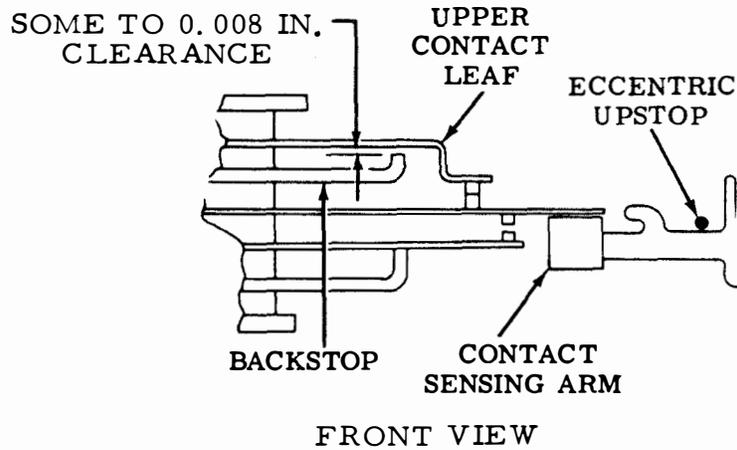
Contact Sensing Arm - Upstop Clearance
